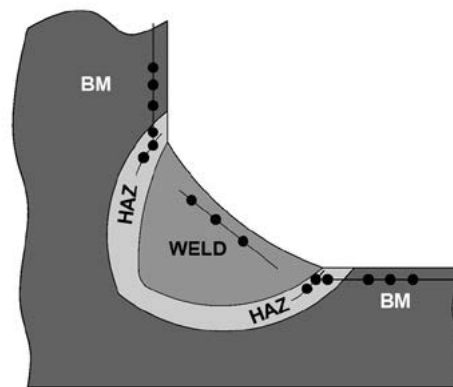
Arrangement of the measurement points on the cross-section of the welded joint
